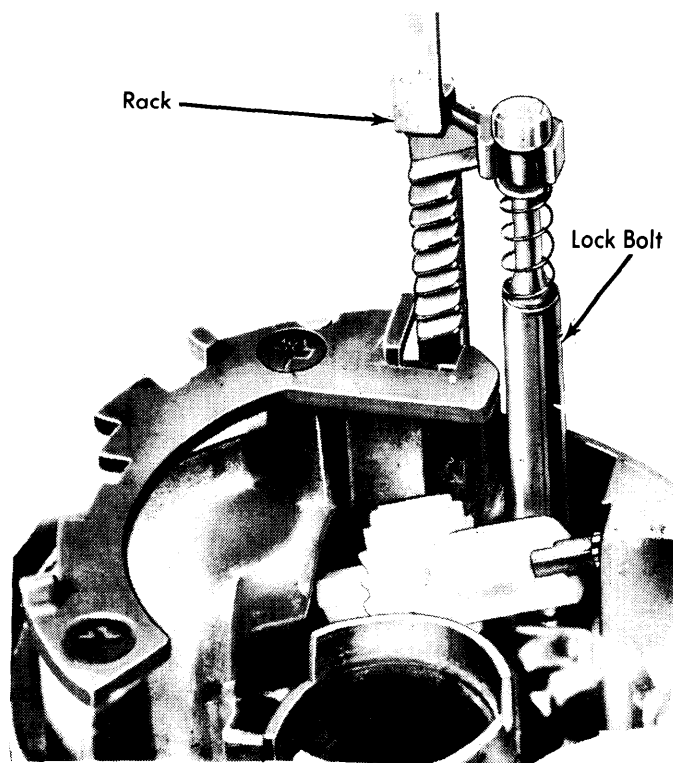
Installing Lock Rack and Bolt into Shift Bowl
